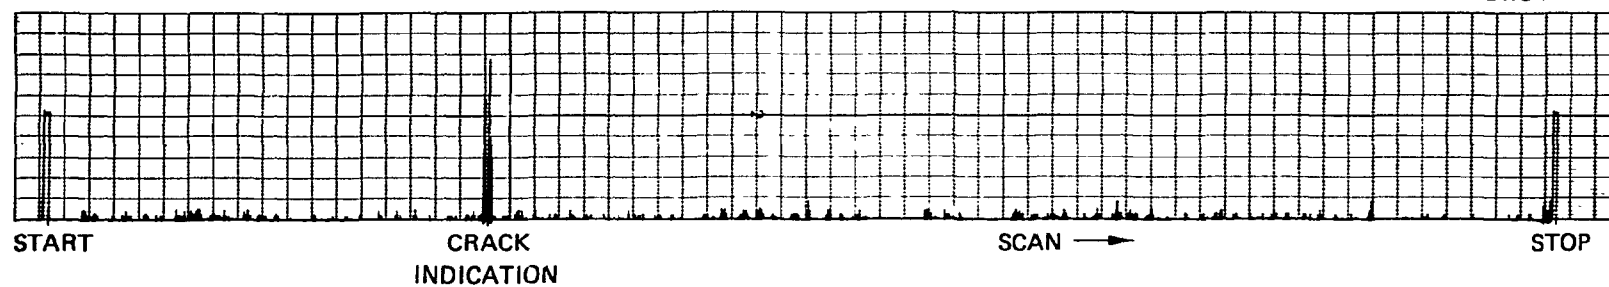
Results of ultrasonic inspection of modified 9 Cr-1 Mo steel tube 3628 after normalizing and tempering.
